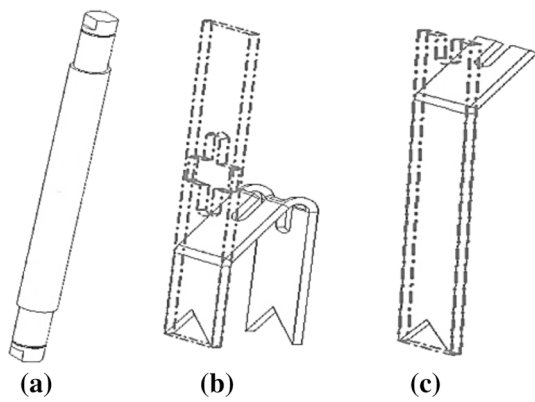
CAD model of Idler parts a Shaft, b Middle Bracket, and c Outer Bracket
